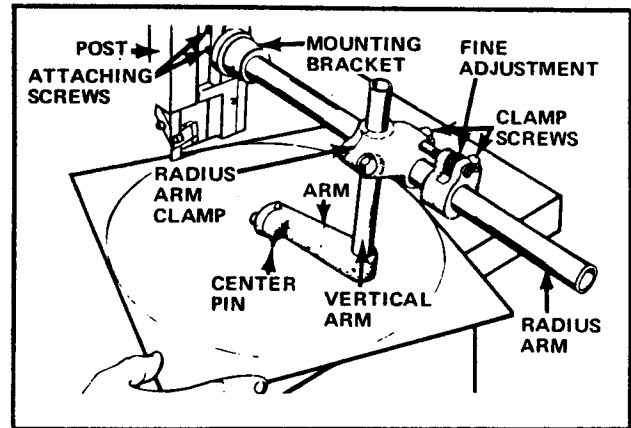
CUTTING A RADIUS WITH DISK CUTTER.
